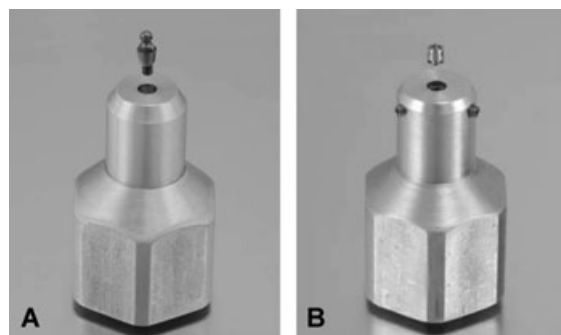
(A) Upper fixture mount designed to hold a spherical stud implant abutment. (B) Upper fixture mount designed to hold the gold retentive housing for the corresponding spherical stud implant abutment.
